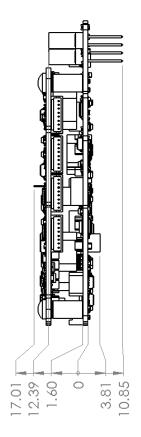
Dimensioned Drawing of 01-02453 XUA EPS
